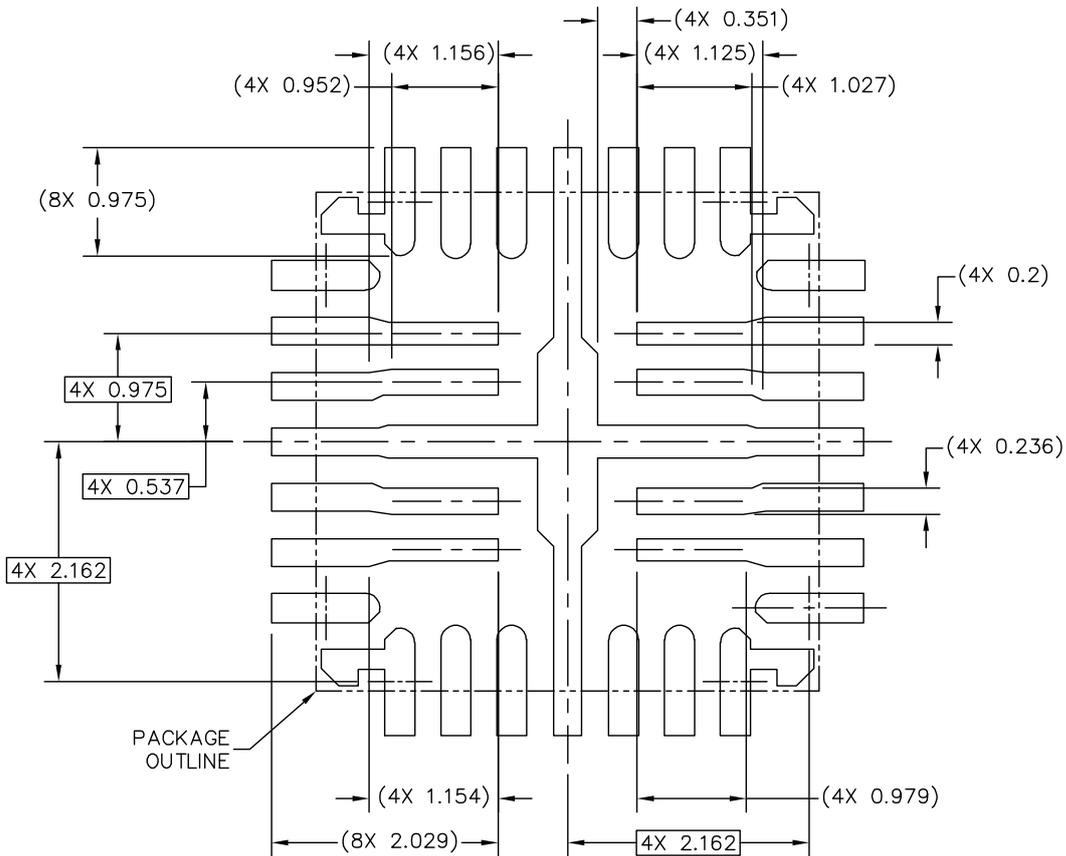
PCB design guidelines for PQFN28 – solder mask opening pattern
